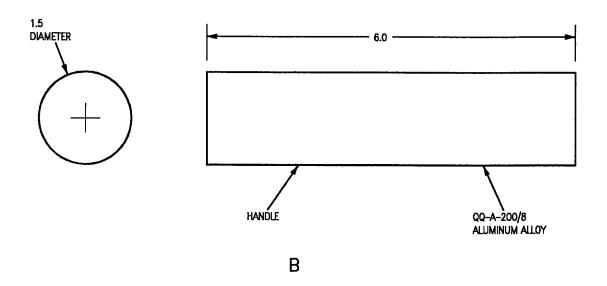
Inboard Pylon Lower Bushing Removal (Sheet 2)
